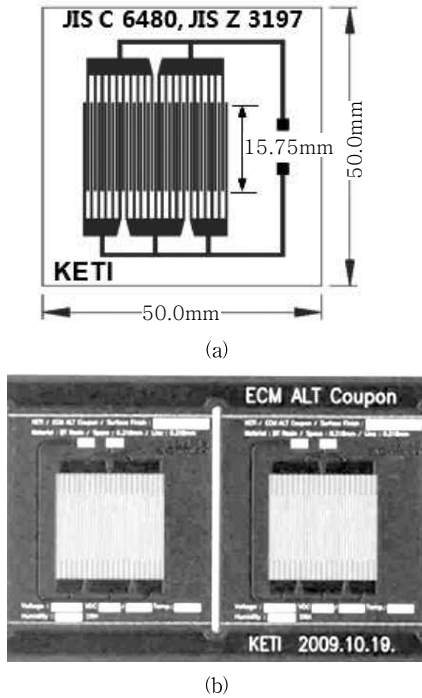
Photograph of PCB coupon for electrochemical ion migration test: (a) is Comb pattern design and (b) is real test coupon
